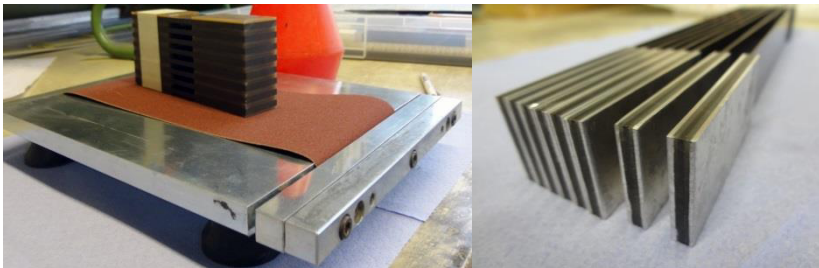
Clamping plate with specimens (left), grinded edges (right)
